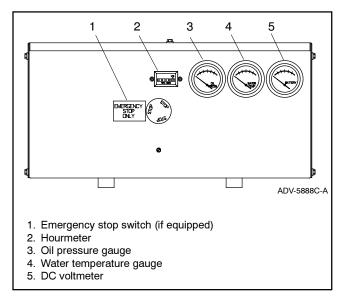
Paralleling Engine Gauge Box Controller (Switchgear)
